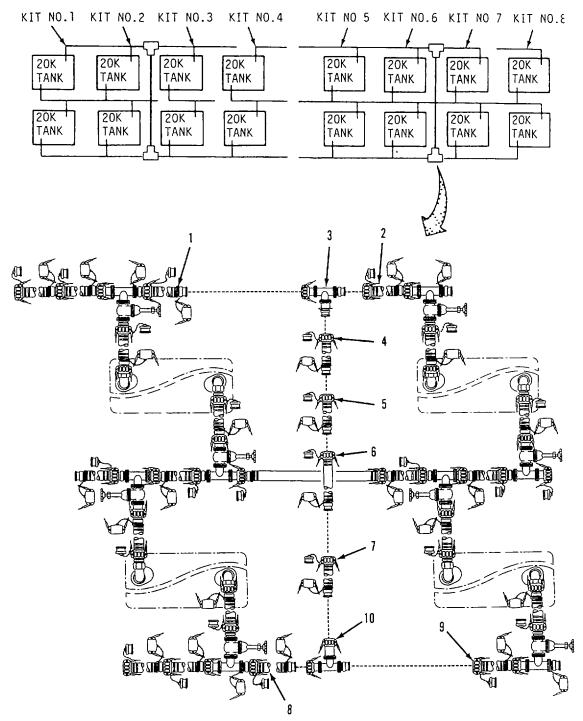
Interconnection Kit Assembly (sheet 2 of 2).
